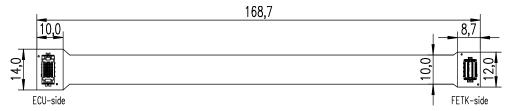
ECU Adapter ETAM4 (Bottom View)
